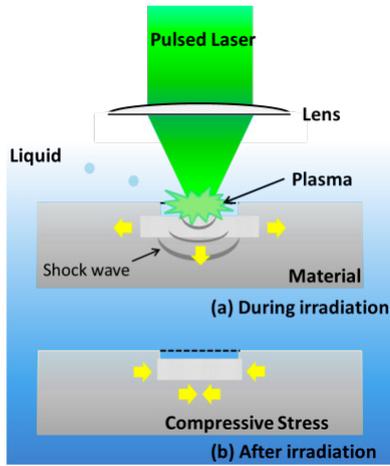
Mechanism for residual stress improvement using laser-induced shock wave.
